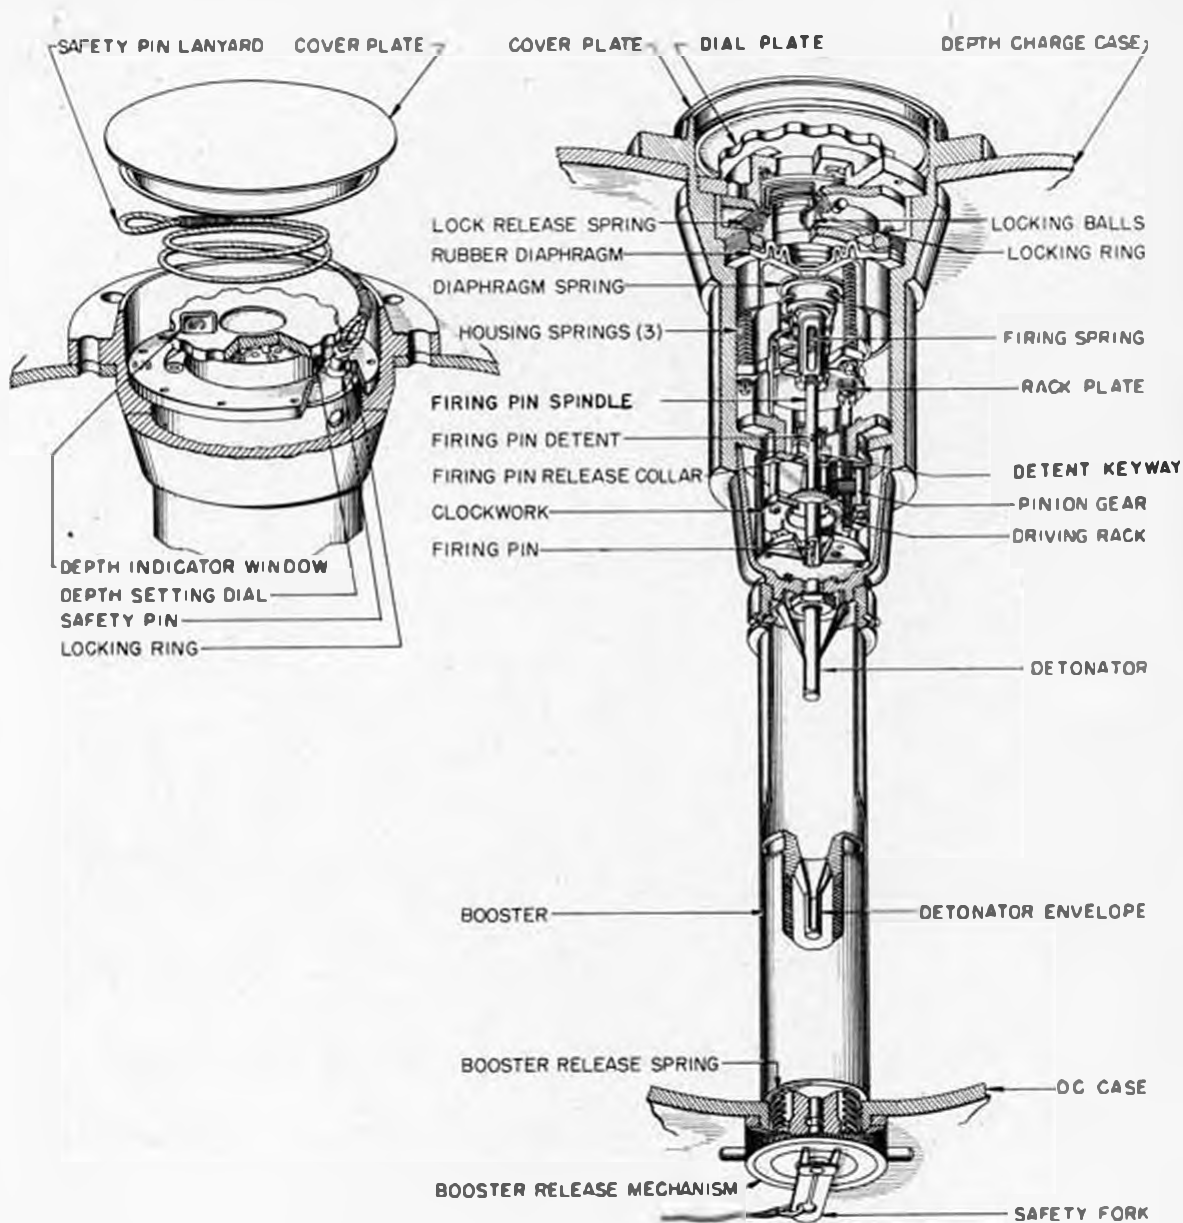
Depth Charge Pistol Type III, Sectional View
